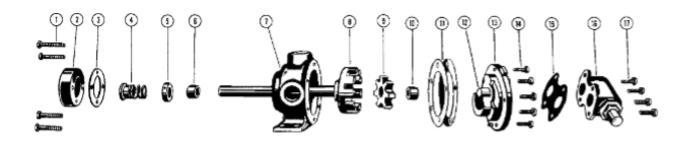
EXPLODED VIEW MODEL H432 AND HL432 PUMP
